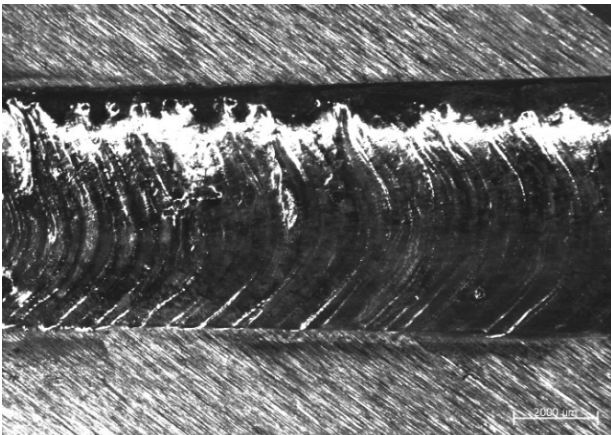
Part shape of bead face of the high speed steel HS6-5-2-5 surface alloyed with the SiC, laser power 1.7 kW
